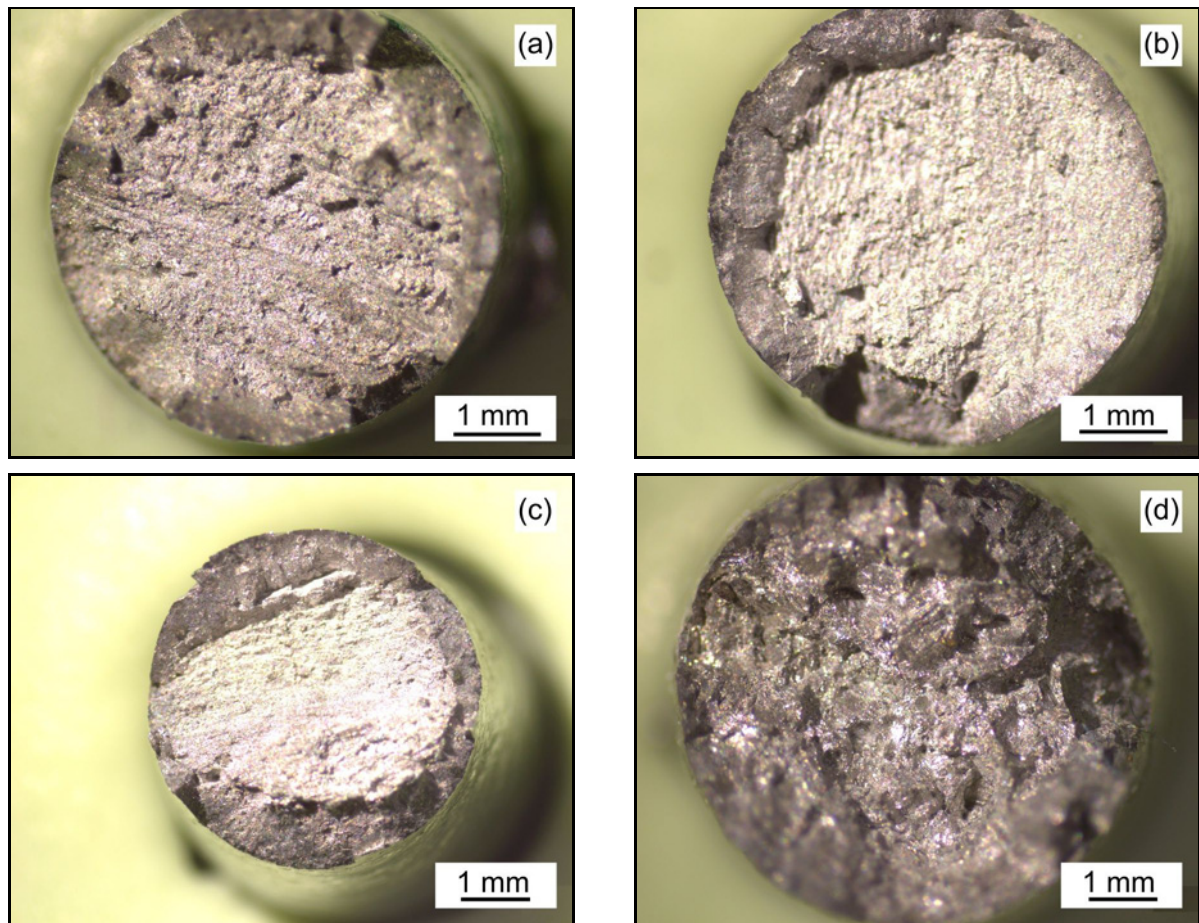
Fracture surfaces of horizontally built samples: (a) as-built, (b) HIP1, (c) HIP2, and (d) HIP3.
